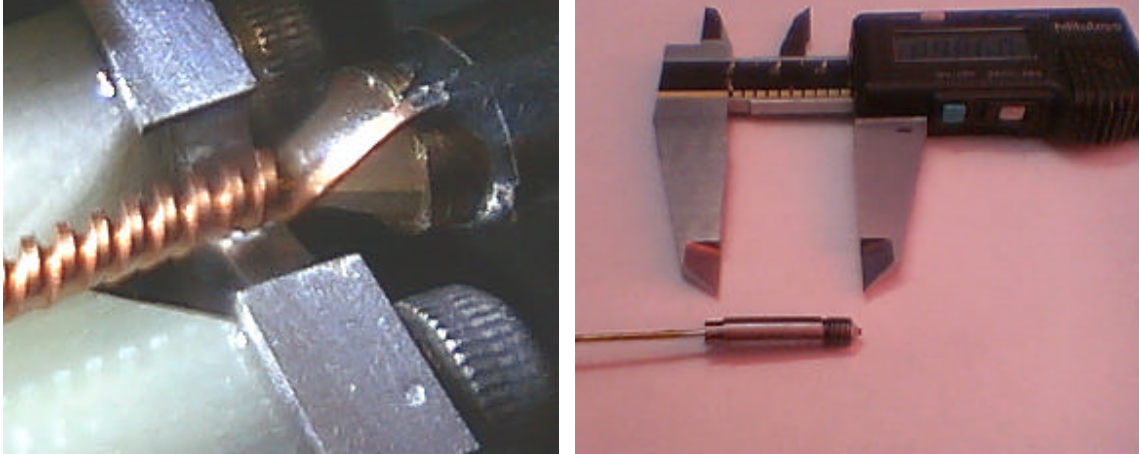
End jumper, left. End cap soldered to the tube, right. Caliper opened for 1 inch.
